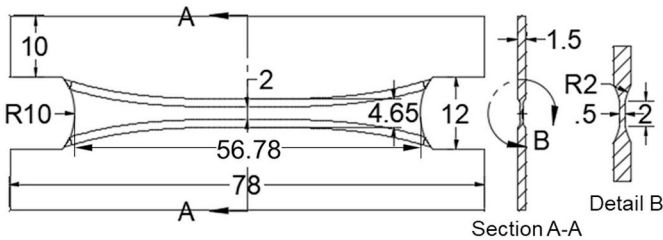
Schematic of the butterfly sample used for pure shear and combined loading stress states (dimensions in mm). Geometry from Ref. [39].
